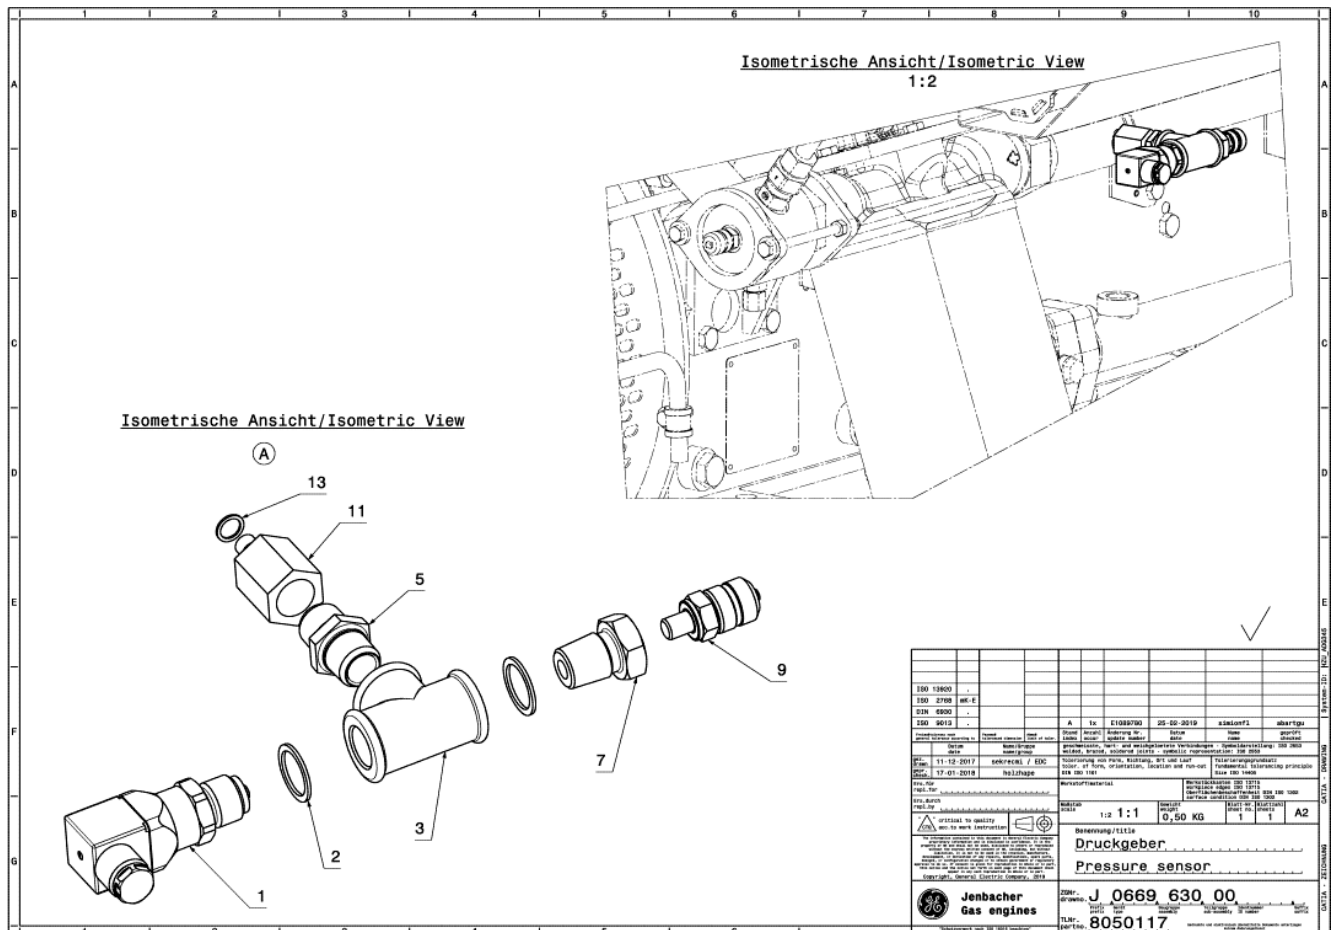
Drawing – Oil filter differential pressure module – PN8050117
